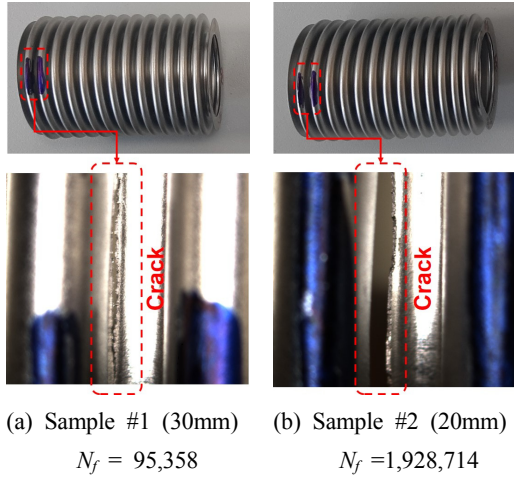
Examples of fatigue crack initiation location and shape of the cracking
